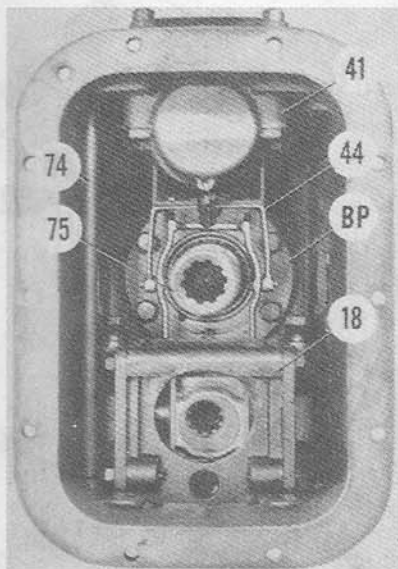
Hydraulic power lift installation on TE20 and TO20 when viewed from front face of rear axle center housing. TO30 is similar.
